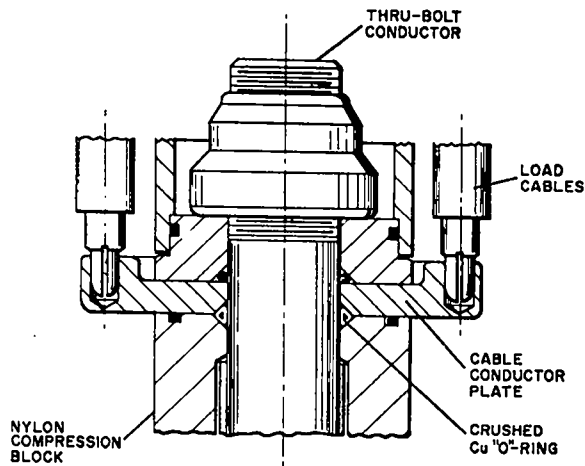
Scylla IA cable cartridge showing crushed O-ring connection from through-bolt conductor to cable conductor plate.
